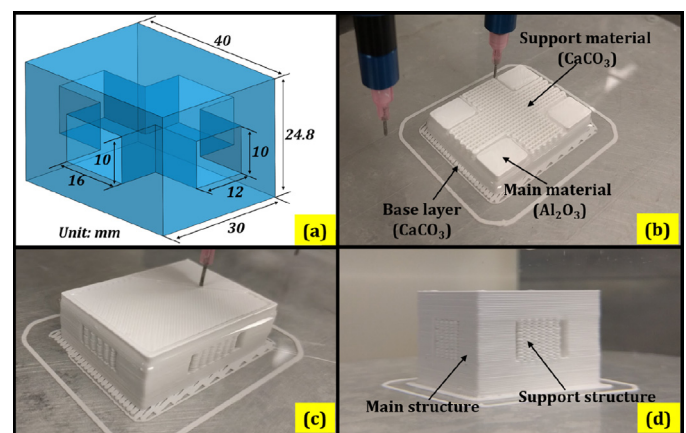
Cuboid part with rectangular holes: (a) CAD model, (b) and (c) part being printed, (d) part printed completely and surrounded by oil.
